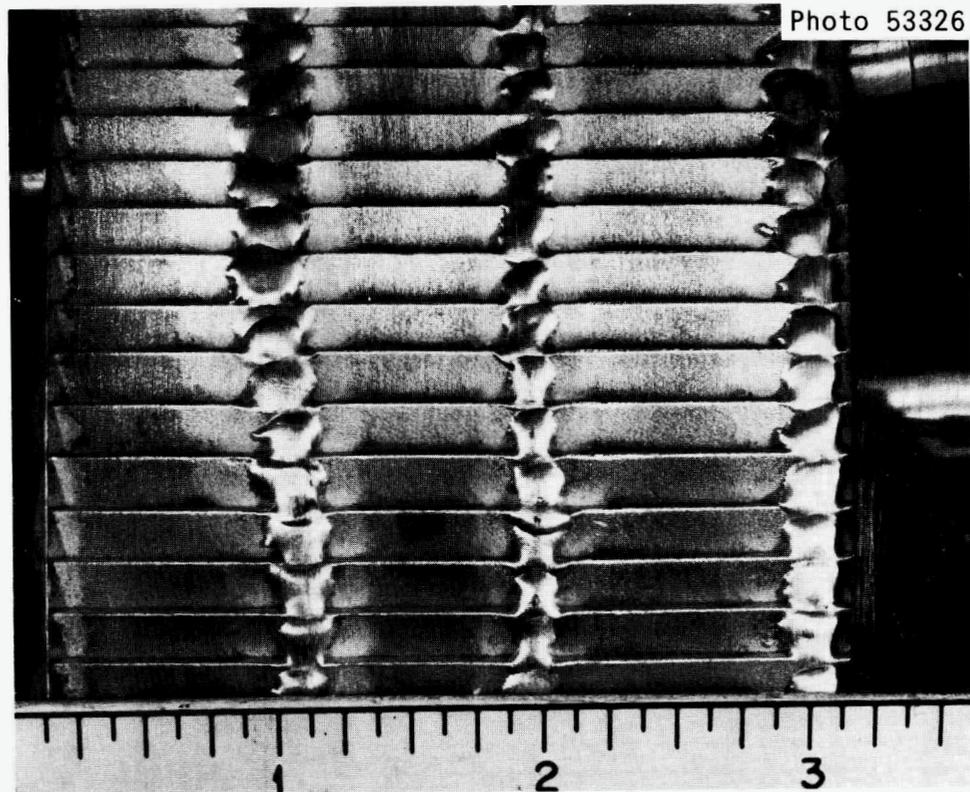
Circumferential Welds  $1/8$  in. Wide on Completely Welded Inner Annulus.
